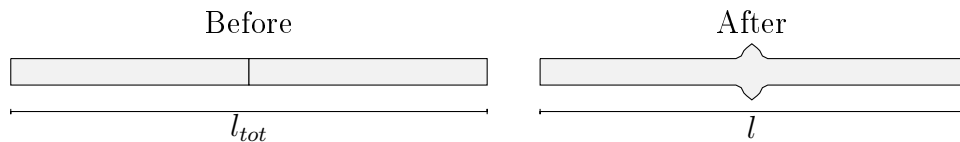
Sketches showing how the lengths before and after welding were measured.
